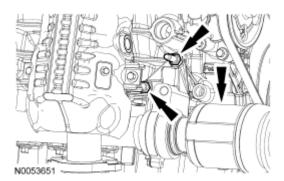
Locating Stud Bolts & RH Halfshaft/Intermediate Shaft Assembly Courtesy of FORD MOTOR CO.
